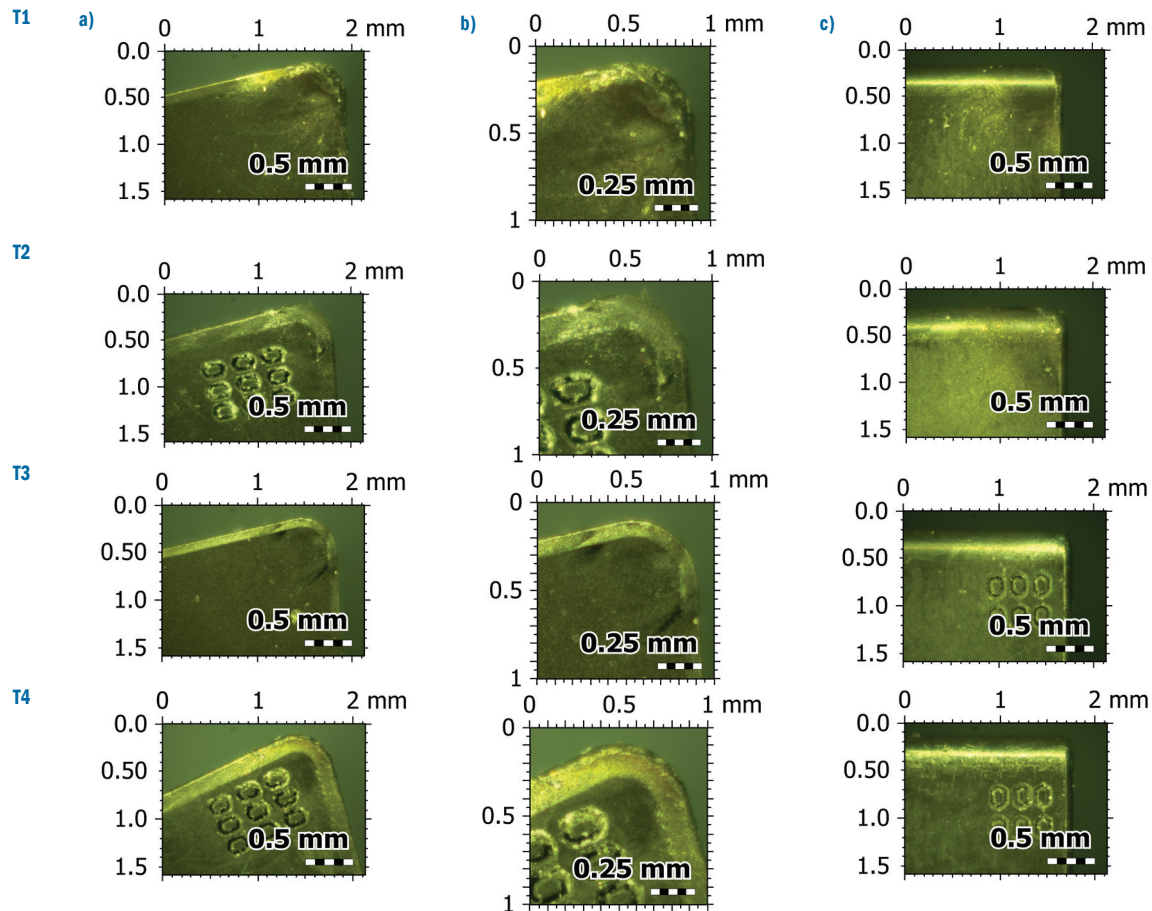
SEM tool wear patterns of four types of cutting tools; a) front surface; b) local magnification; and c) side surface (all units in mm)
